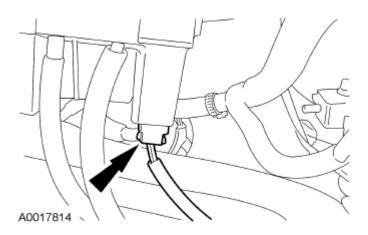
Locating PDB Cable Nut Courtesy of FORD MOTOR CO.
